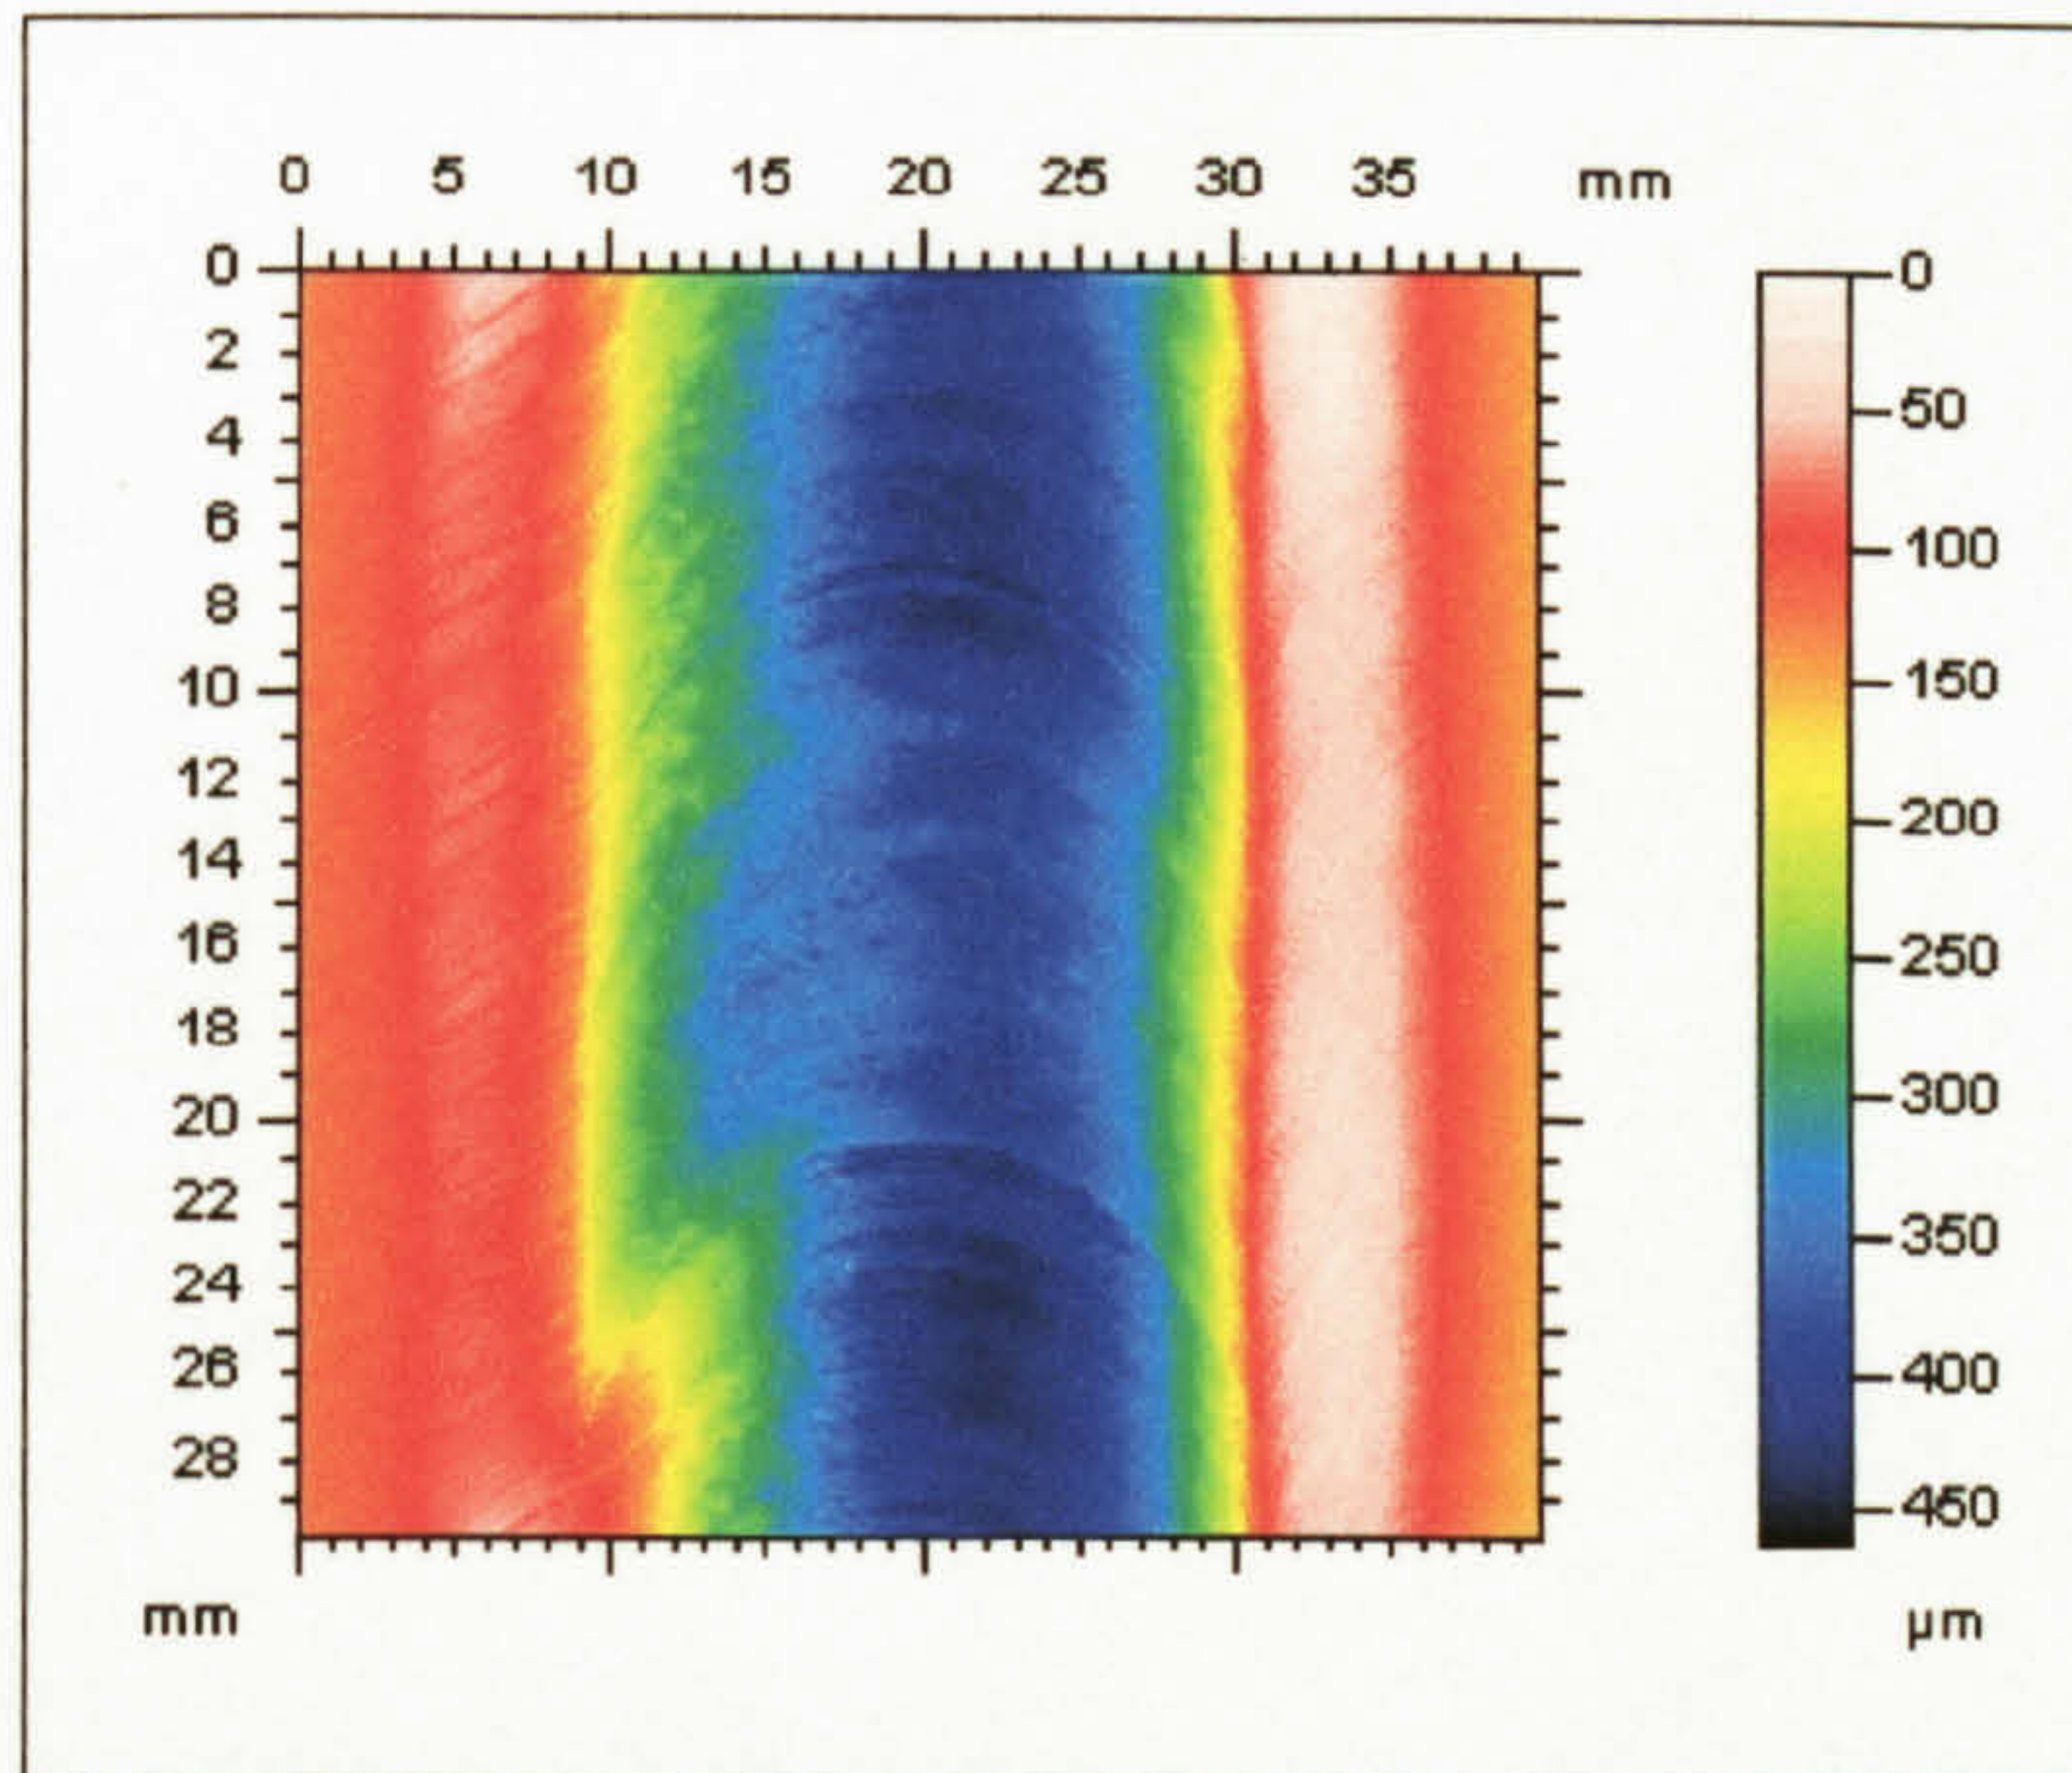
Friction band surface, 2nd pass, of a FS DP weld exhibiting the circular grooves.
